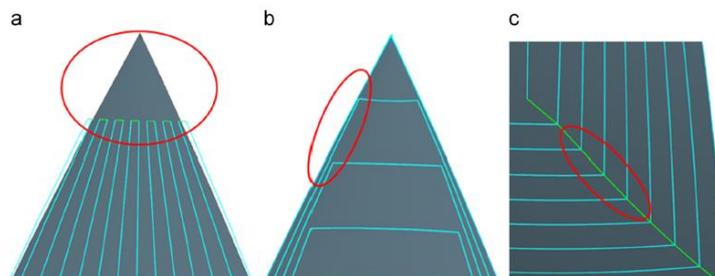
Tool paths inconsistency (CALLEJA *et al.*, 2014).
